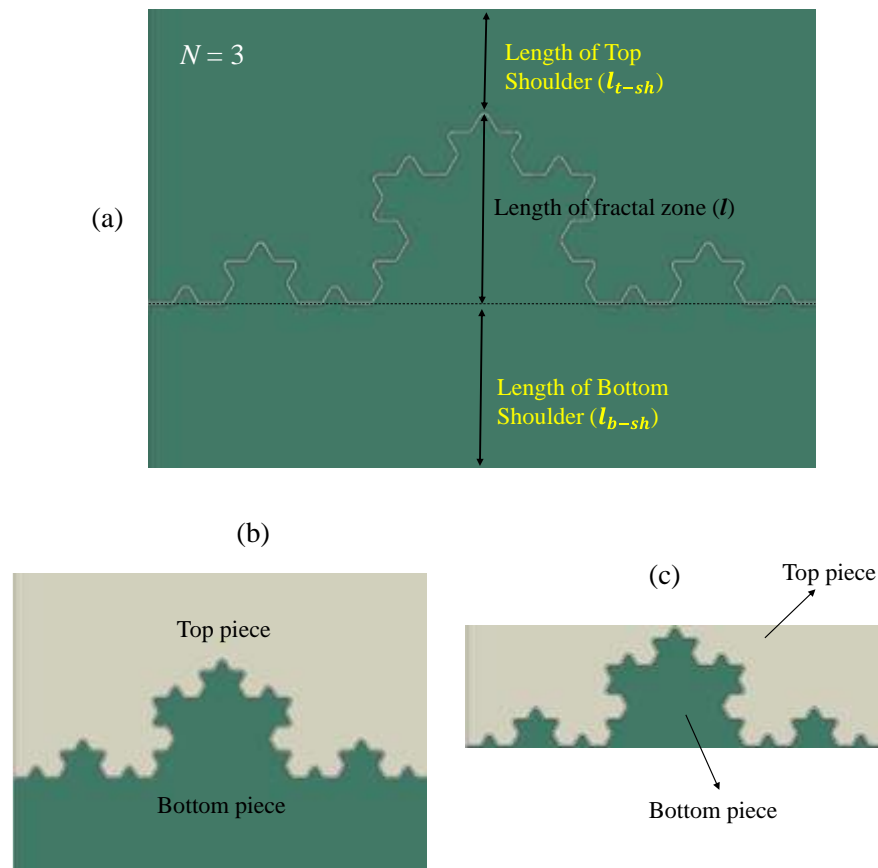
Geometrical definition of top shoulder, bottom shoulder and fractal zone: (b) top and bottom pieces including shoulders, and (c) top and bottom pieces excluding shoulders.
